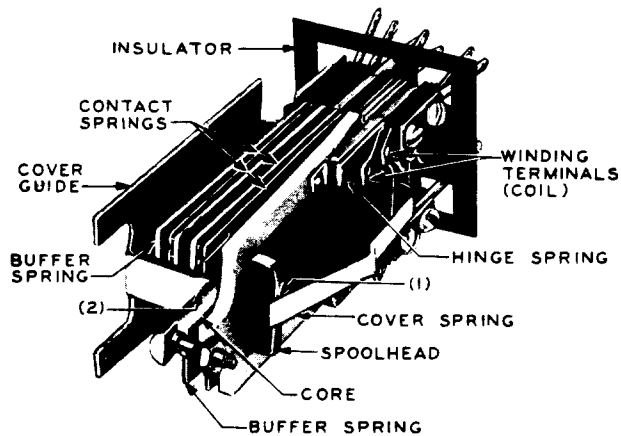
Fig. D — Relay Arranged for Mounting Individual Cover — 282-Type Relay Shown
